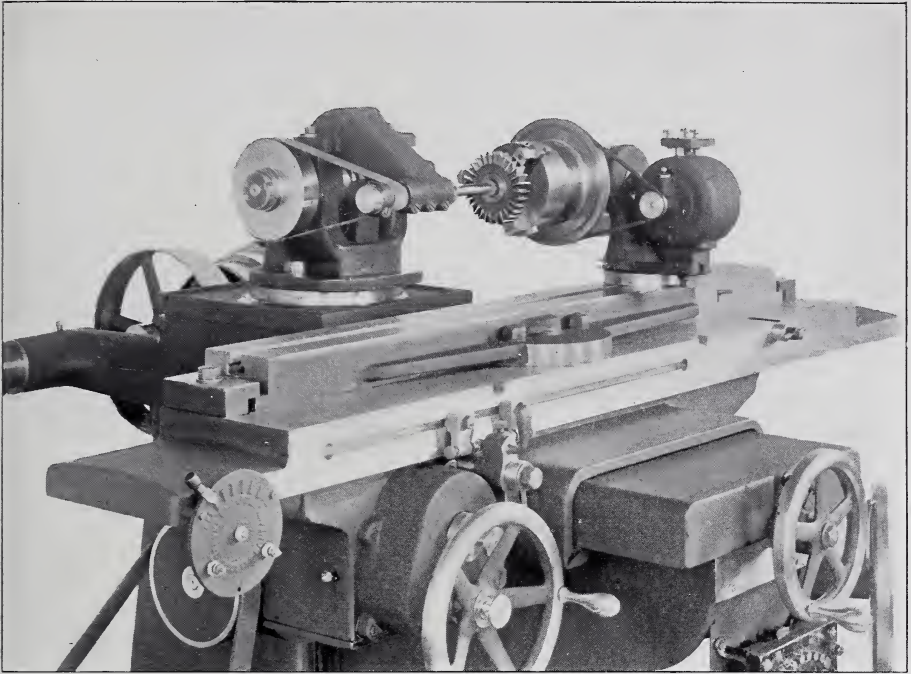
A CINCINNATI MACHINE ARRANGED FOR INTERNAL GRINDING
